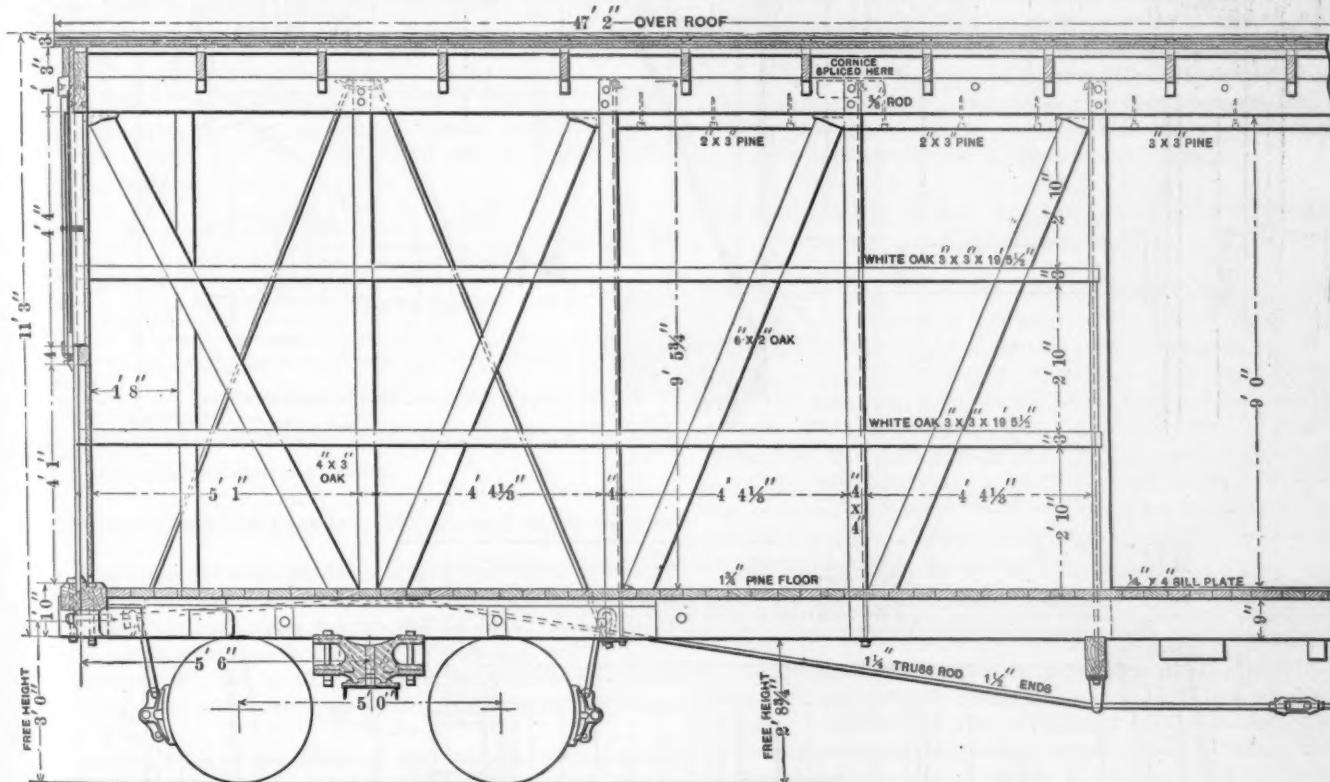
Framing of Forty-six Foot Furniture Car.—Chicago, Milwaukee & St. Paul Railway.
